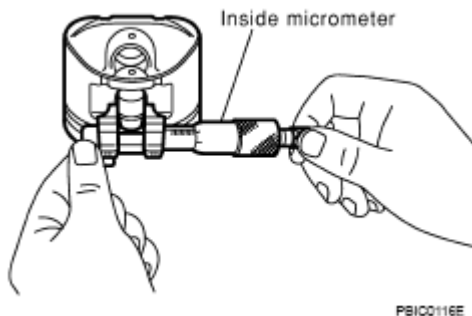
Measuring Inner Diameter Of Piston Pin Hole
